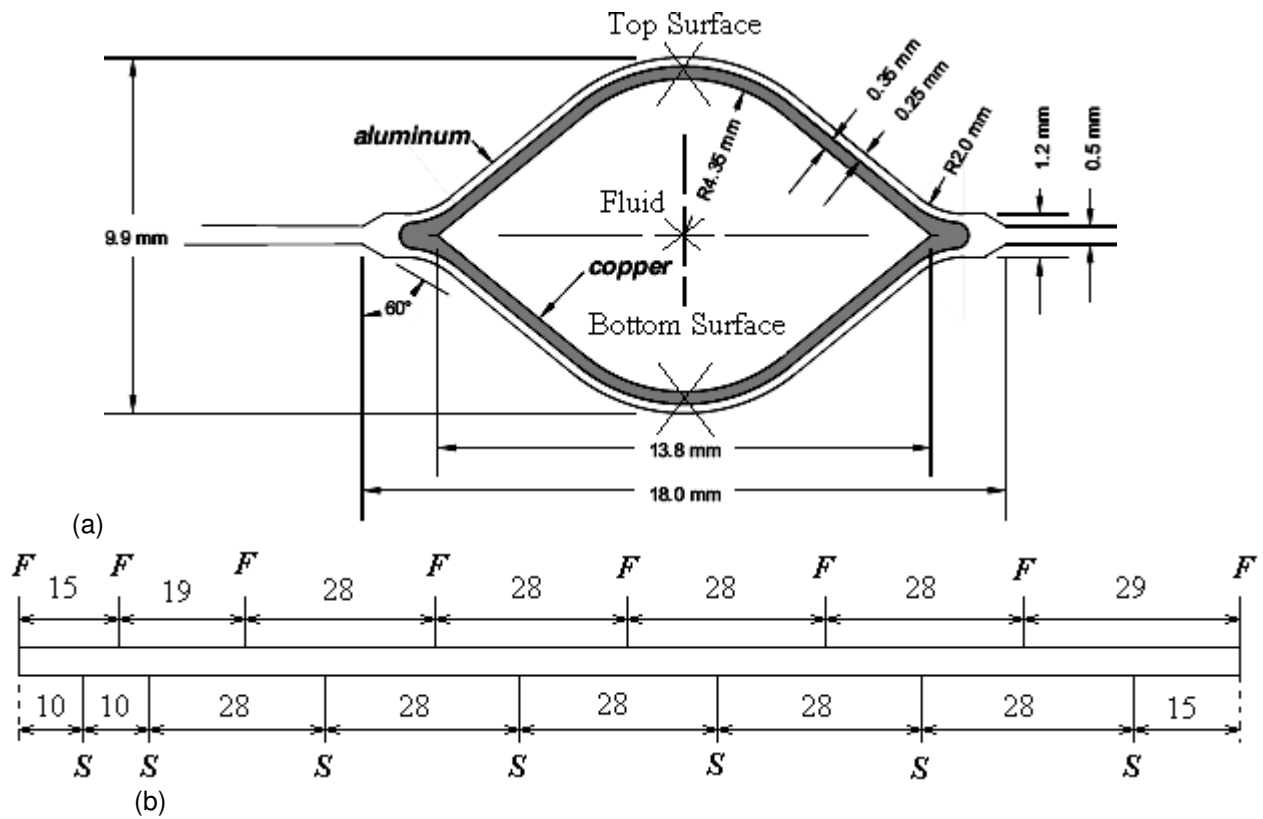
Thermocouple locations in a cross-section and along the finned tube (dimension in cm)
